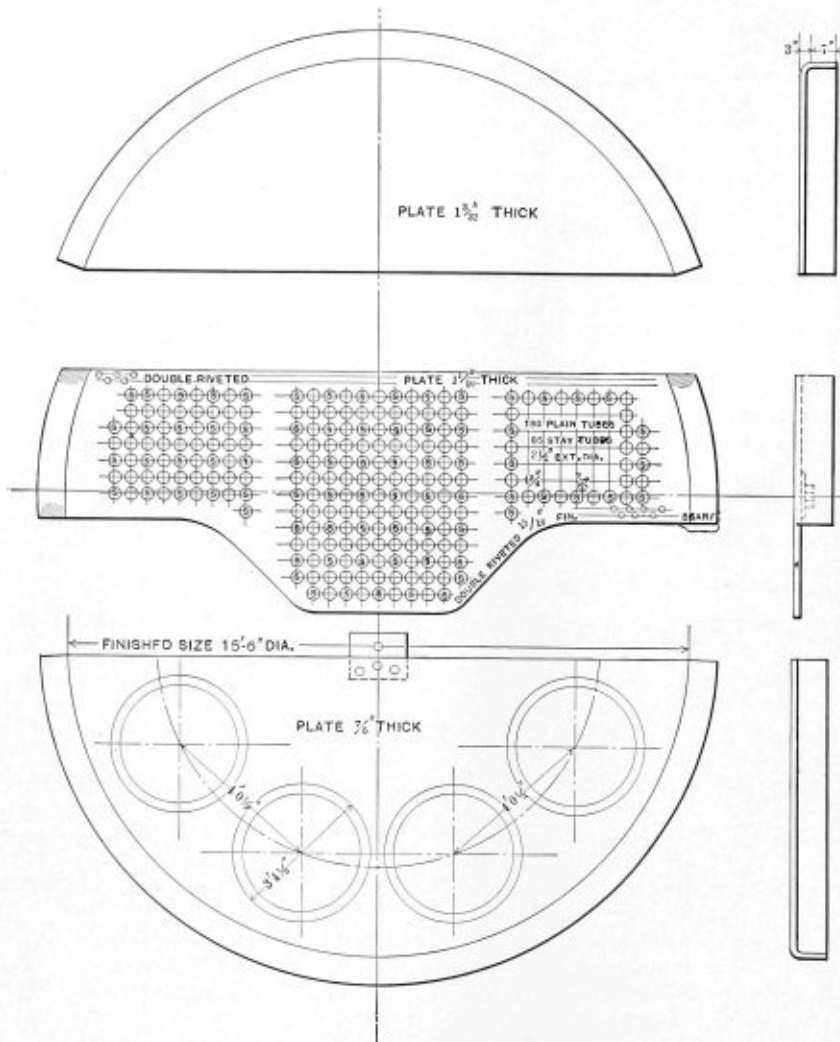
END PLATES OF A MARINE BOILER WHICH REQUIRE FLANGING.
